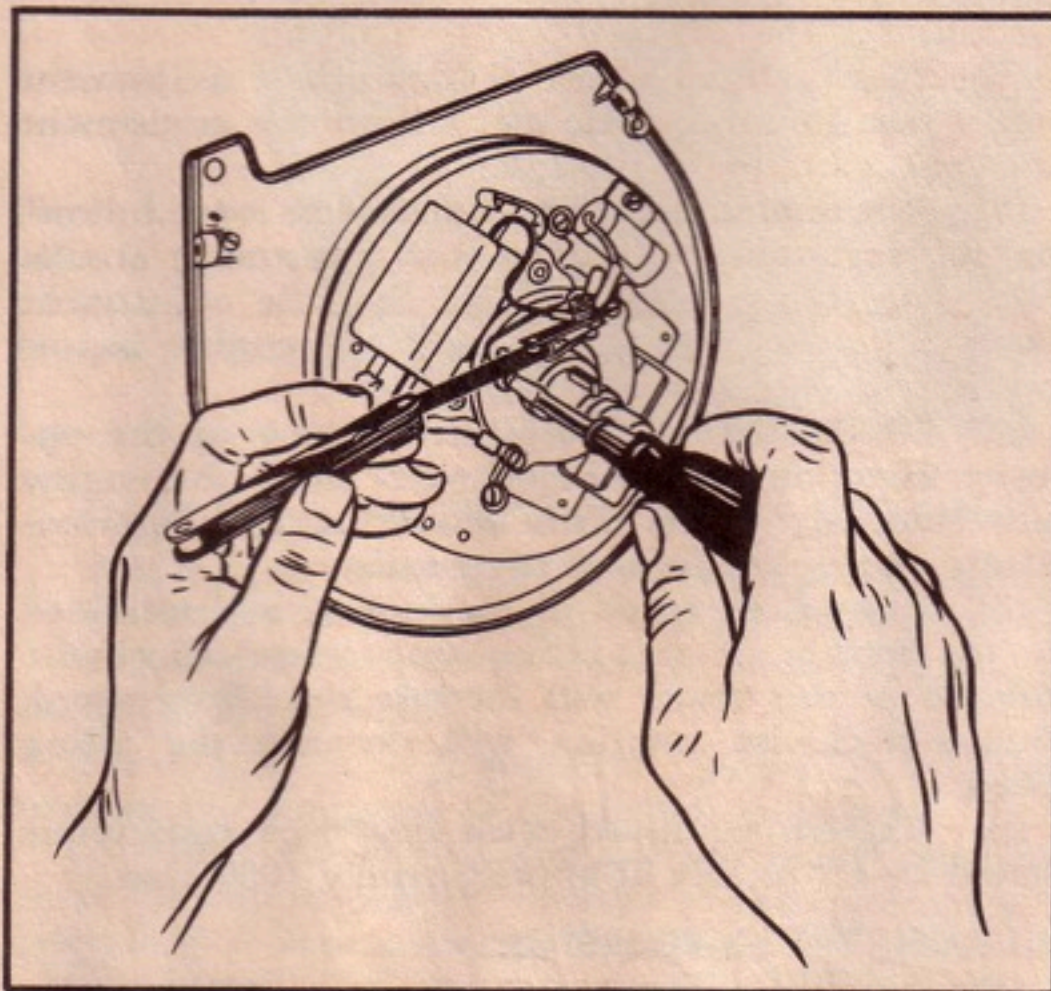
Adjusting Breaker Points on Scintilla Magneto
